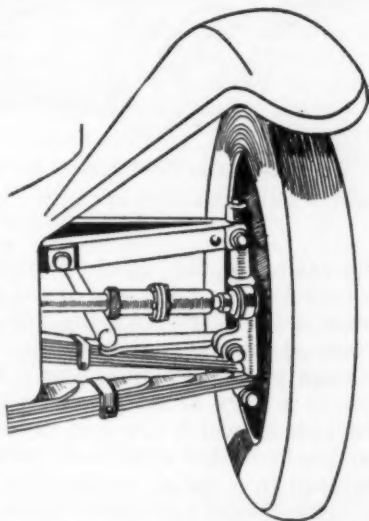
THE ED. PARVILLE DESIGN, A FRENCH ELECTRIC FRONT-DRIVE
